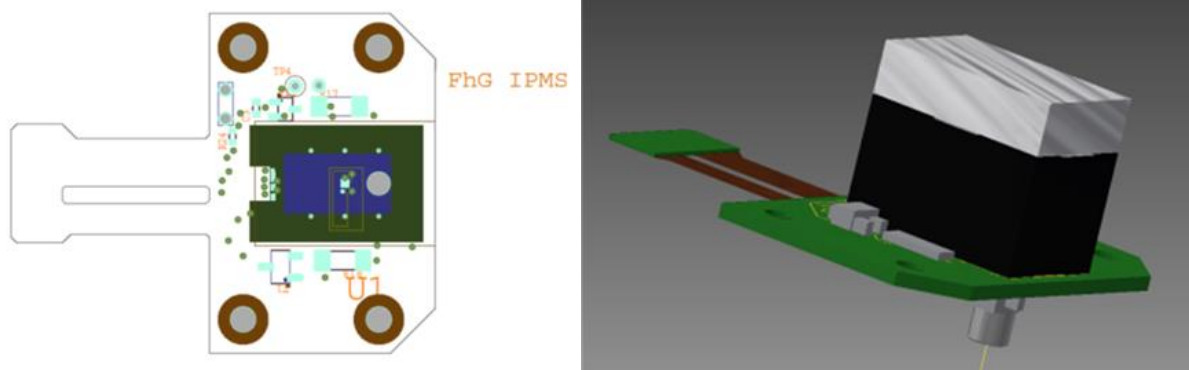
Left: Sketch of NIR spectrometer mounted on the read-out board. Right: Design drawing of the spectrometer on its read-out board.
